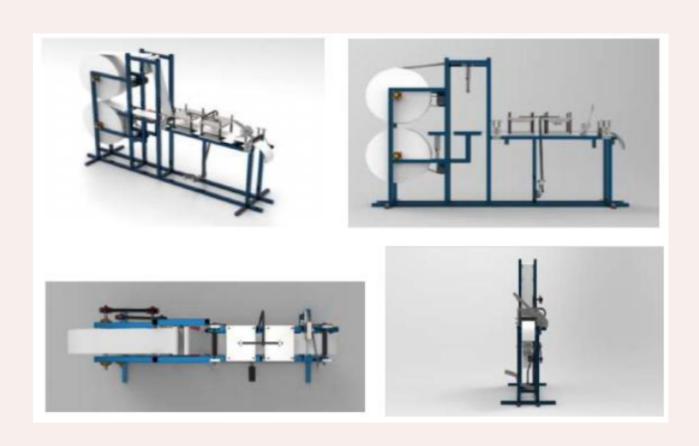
Isometric, side, top and front view of the final CAD models of the proposed design
